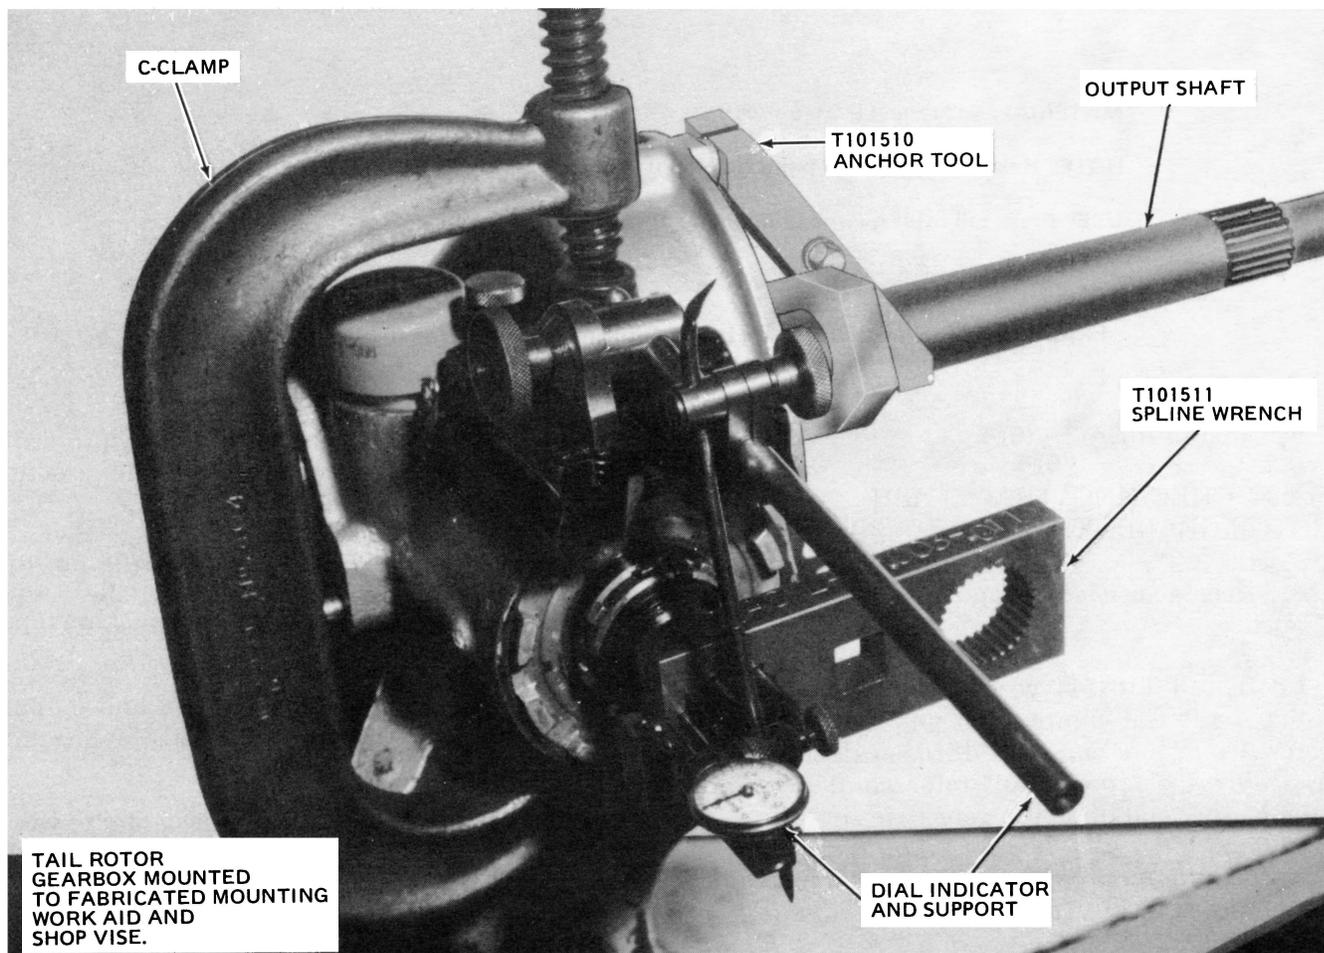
Fabrication of tail rotor gearbox mounting — work aid.
